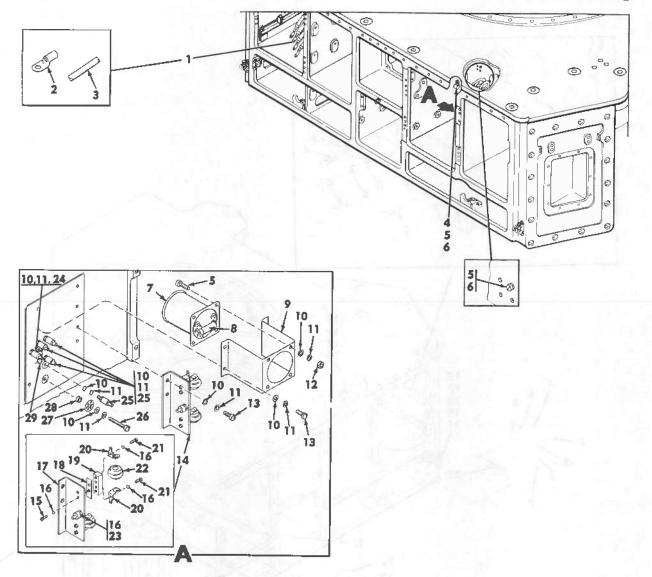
EQUIPMENT ENGLOSURE, AZIMUTH DRIVE /9136465/-PAPTIAL EXPLODED VIFW
